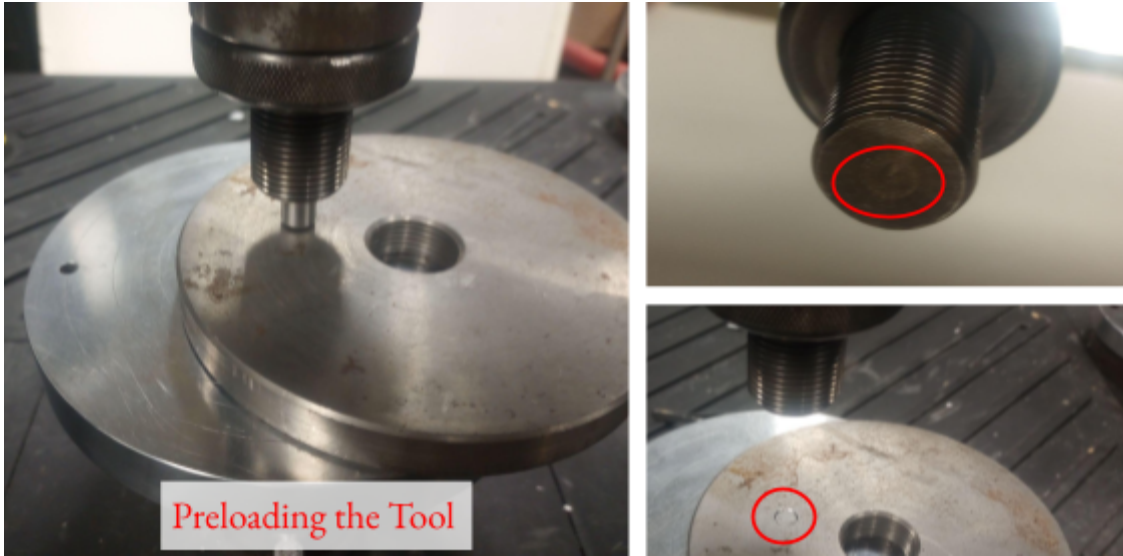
Tool was preloaded under a steel plate that resulted in plate and tool deformation
